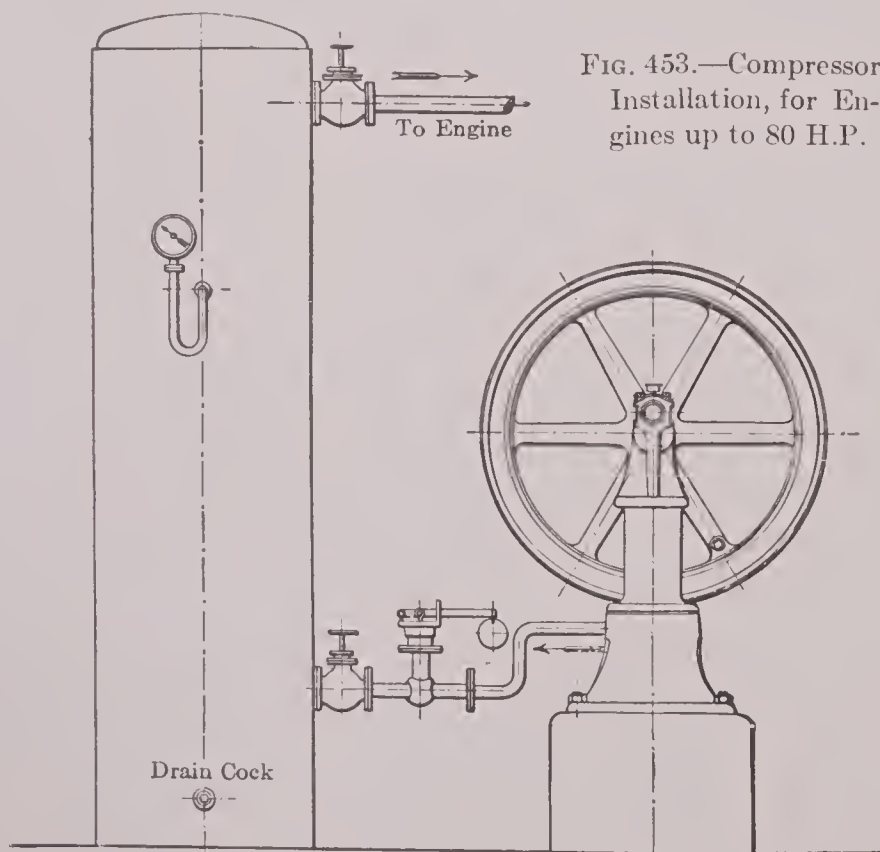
Compressor Installation, for Engines up to 80 H.P.
